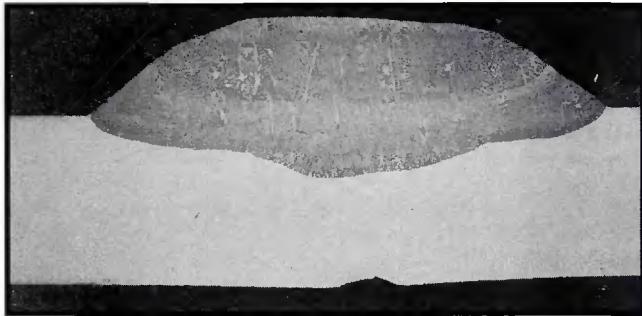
254SLX. Pitting in the HAZ on the side opposite the weld bead.
